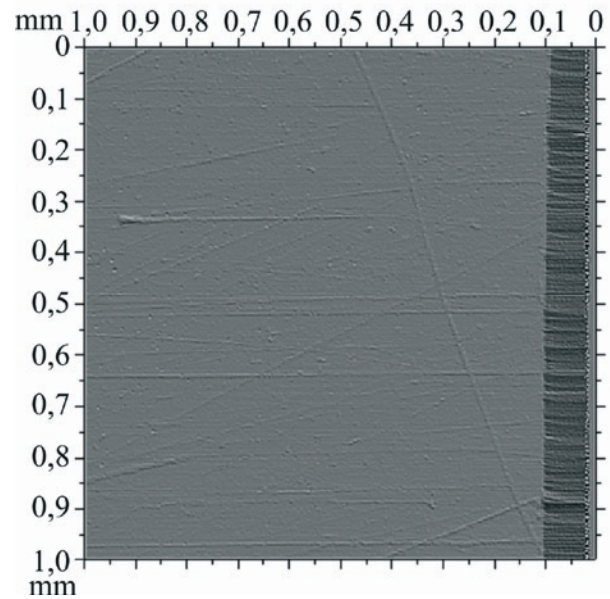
The image of the punch flank surface close to cutting edge after 500 000 cuts with 8% blanking clearance (M3:2+TiN material)
